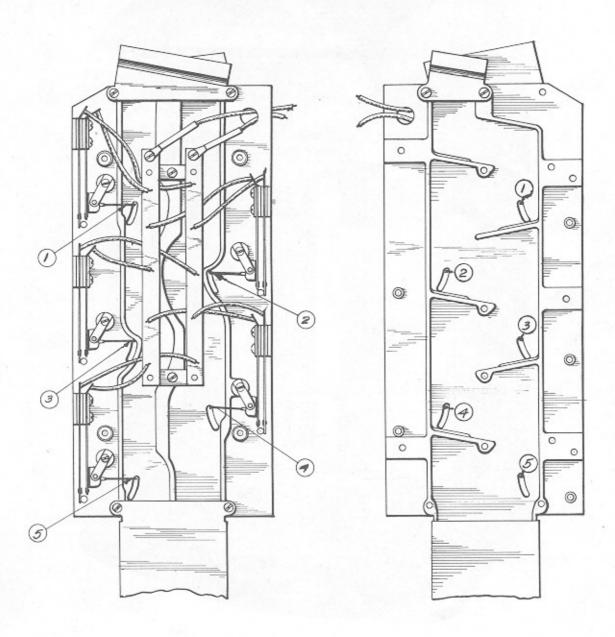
COIN TRIPPER ASSEMBLY
